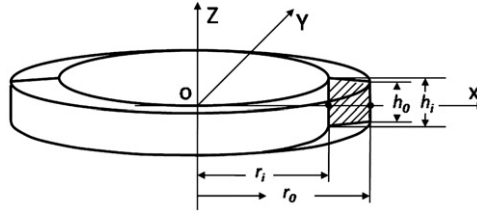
Sketch of the disc element; r_i , r_o : inner and outer radius of annular disc element; h_i , h_o : thickness of the annular disc element at inner and outer radius.
